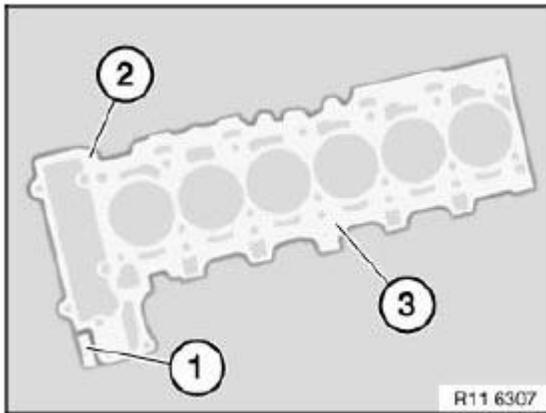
Identifying Cylinder Head Gasket With Rubber Coating
